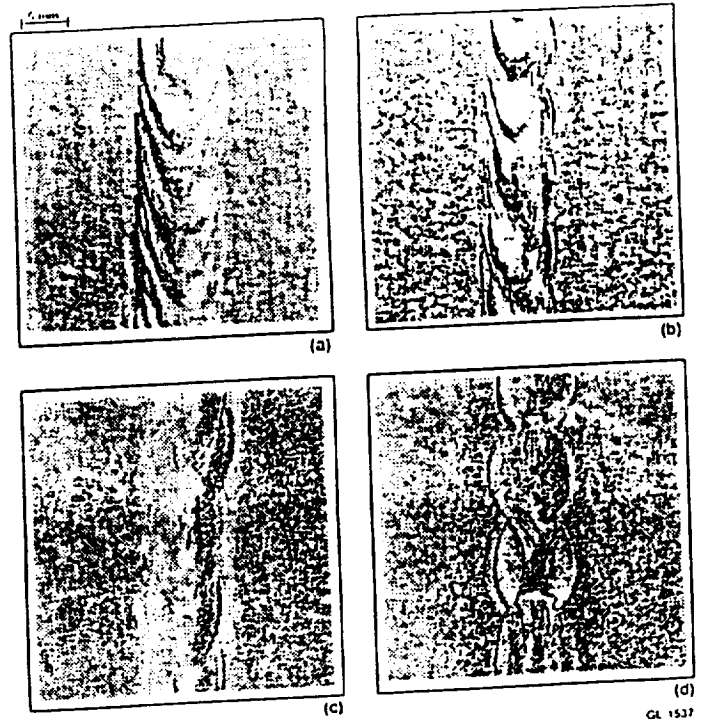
Bottom View of Pulsed Welds at:
